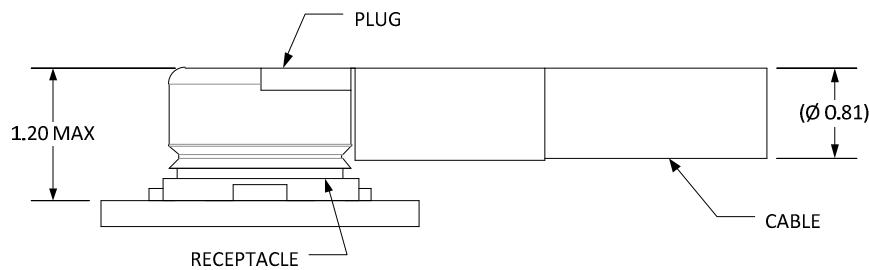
Mated Plug for Ø 0.81 mm Coax Cable
